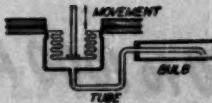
Thermostatic Motor—This assembly is used where it is desirable to have the thermostatic charge confined outside the bellows and within a cup. May be used with or without remote bulb shown.
